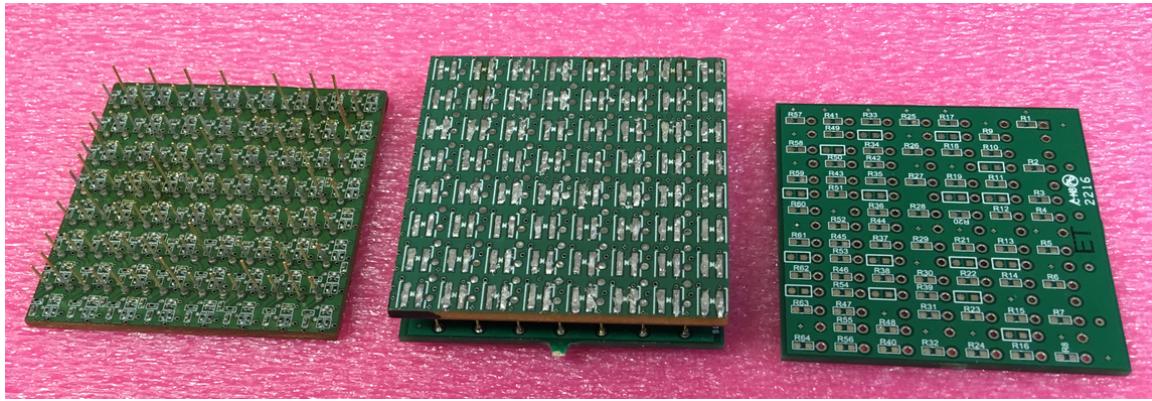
Samples of prototype PCB modules constructed for attempts at SiPM surface mount technology in a Jefferson Lab solder reflow oven.
